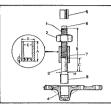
Commutator and bracket bush and self extraction type tool assembly
